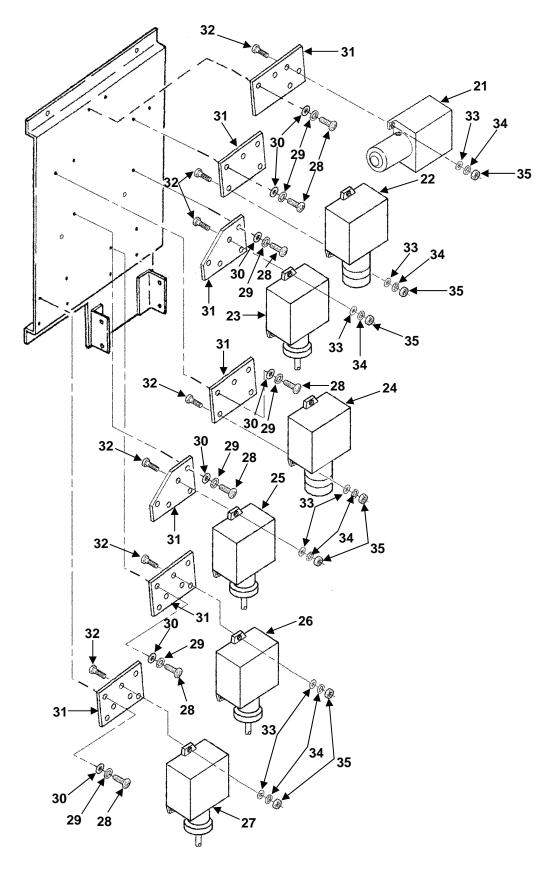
Pressure Switch Panel Assembly (Sheet 3 of 4). (Model ROWPU-1 only)
